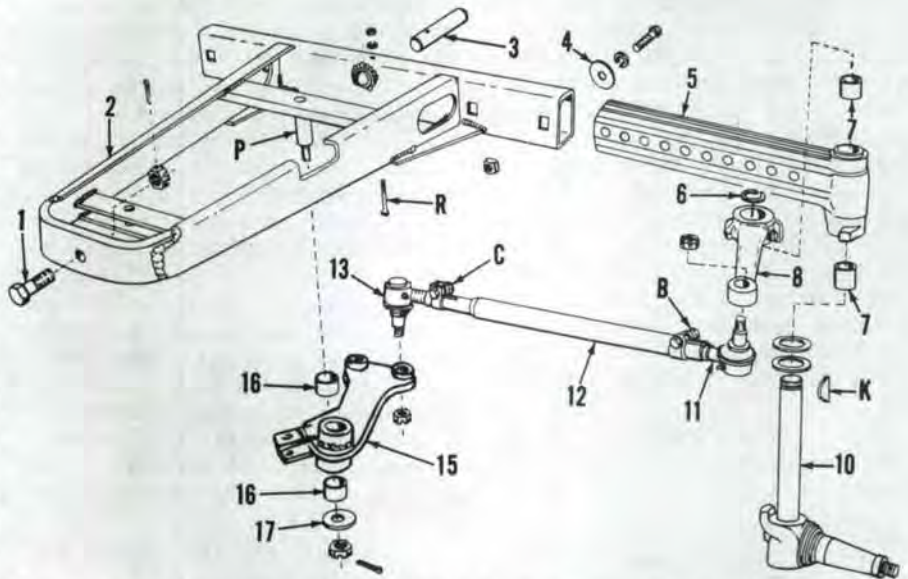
Exploded view of Model D-21 front axle assembly. Bolt (R) retains front pivot pin (3). To adjust front wheel toe-in, remove bolt (B), loosen clamp (C) and turn tie rod tube (12) in or out as required.
